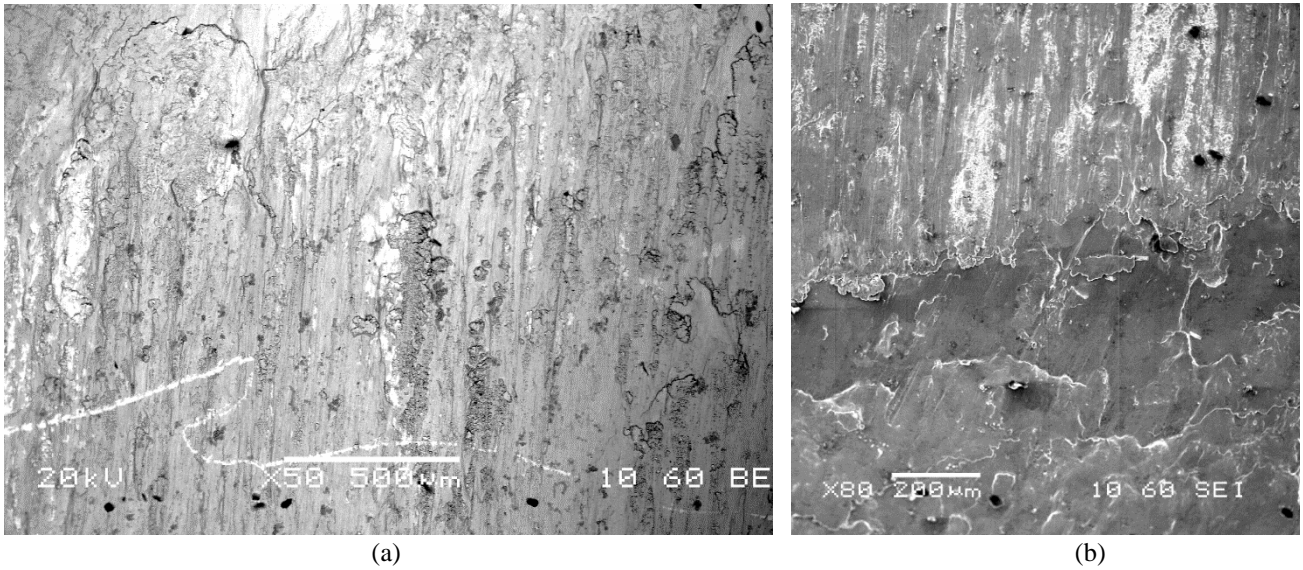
The tooth surface is scuffed, cracked and plastically deformed
